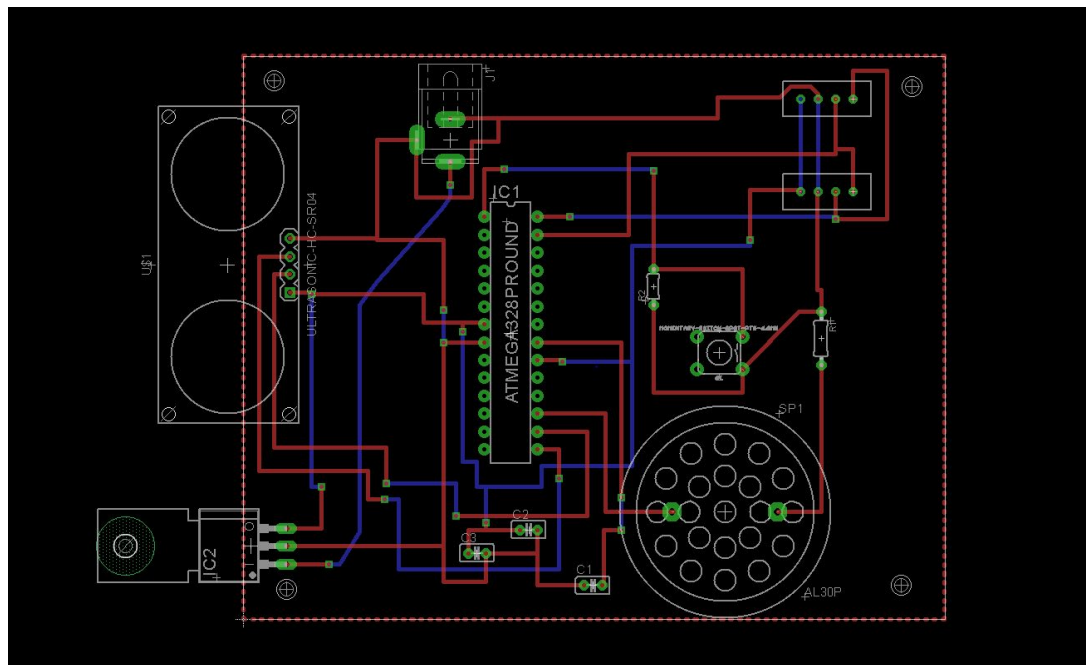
This is the PCB board layout of our design. This is with the soldering of all of the components.
